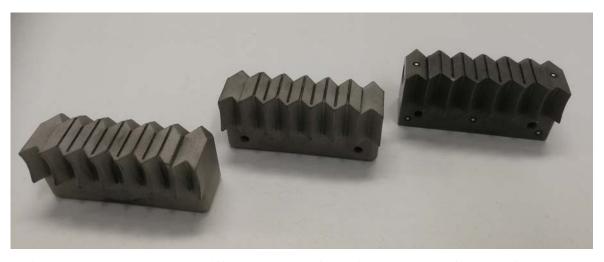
Heated cutter at different stages of precision casting: On the left, the cast piece; in the centre, the machined piece; and on the right, the machined and tempered piece.
